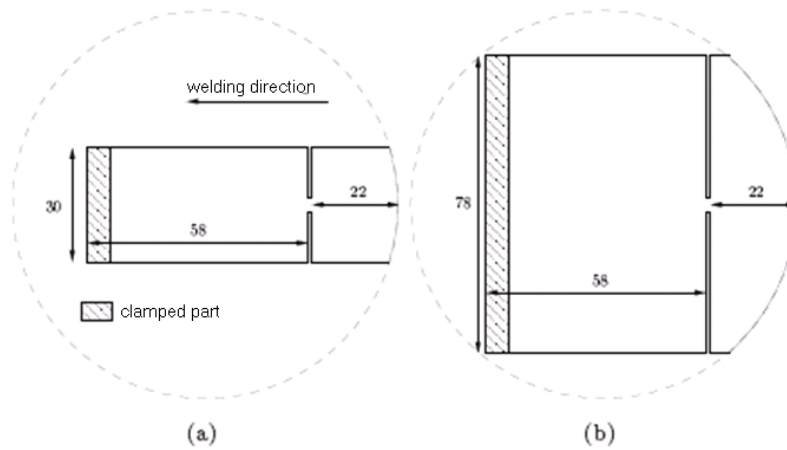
geometry of the JWRI test samples machined out in billets: a) 30 mm width, b) 78 mm width [22].
